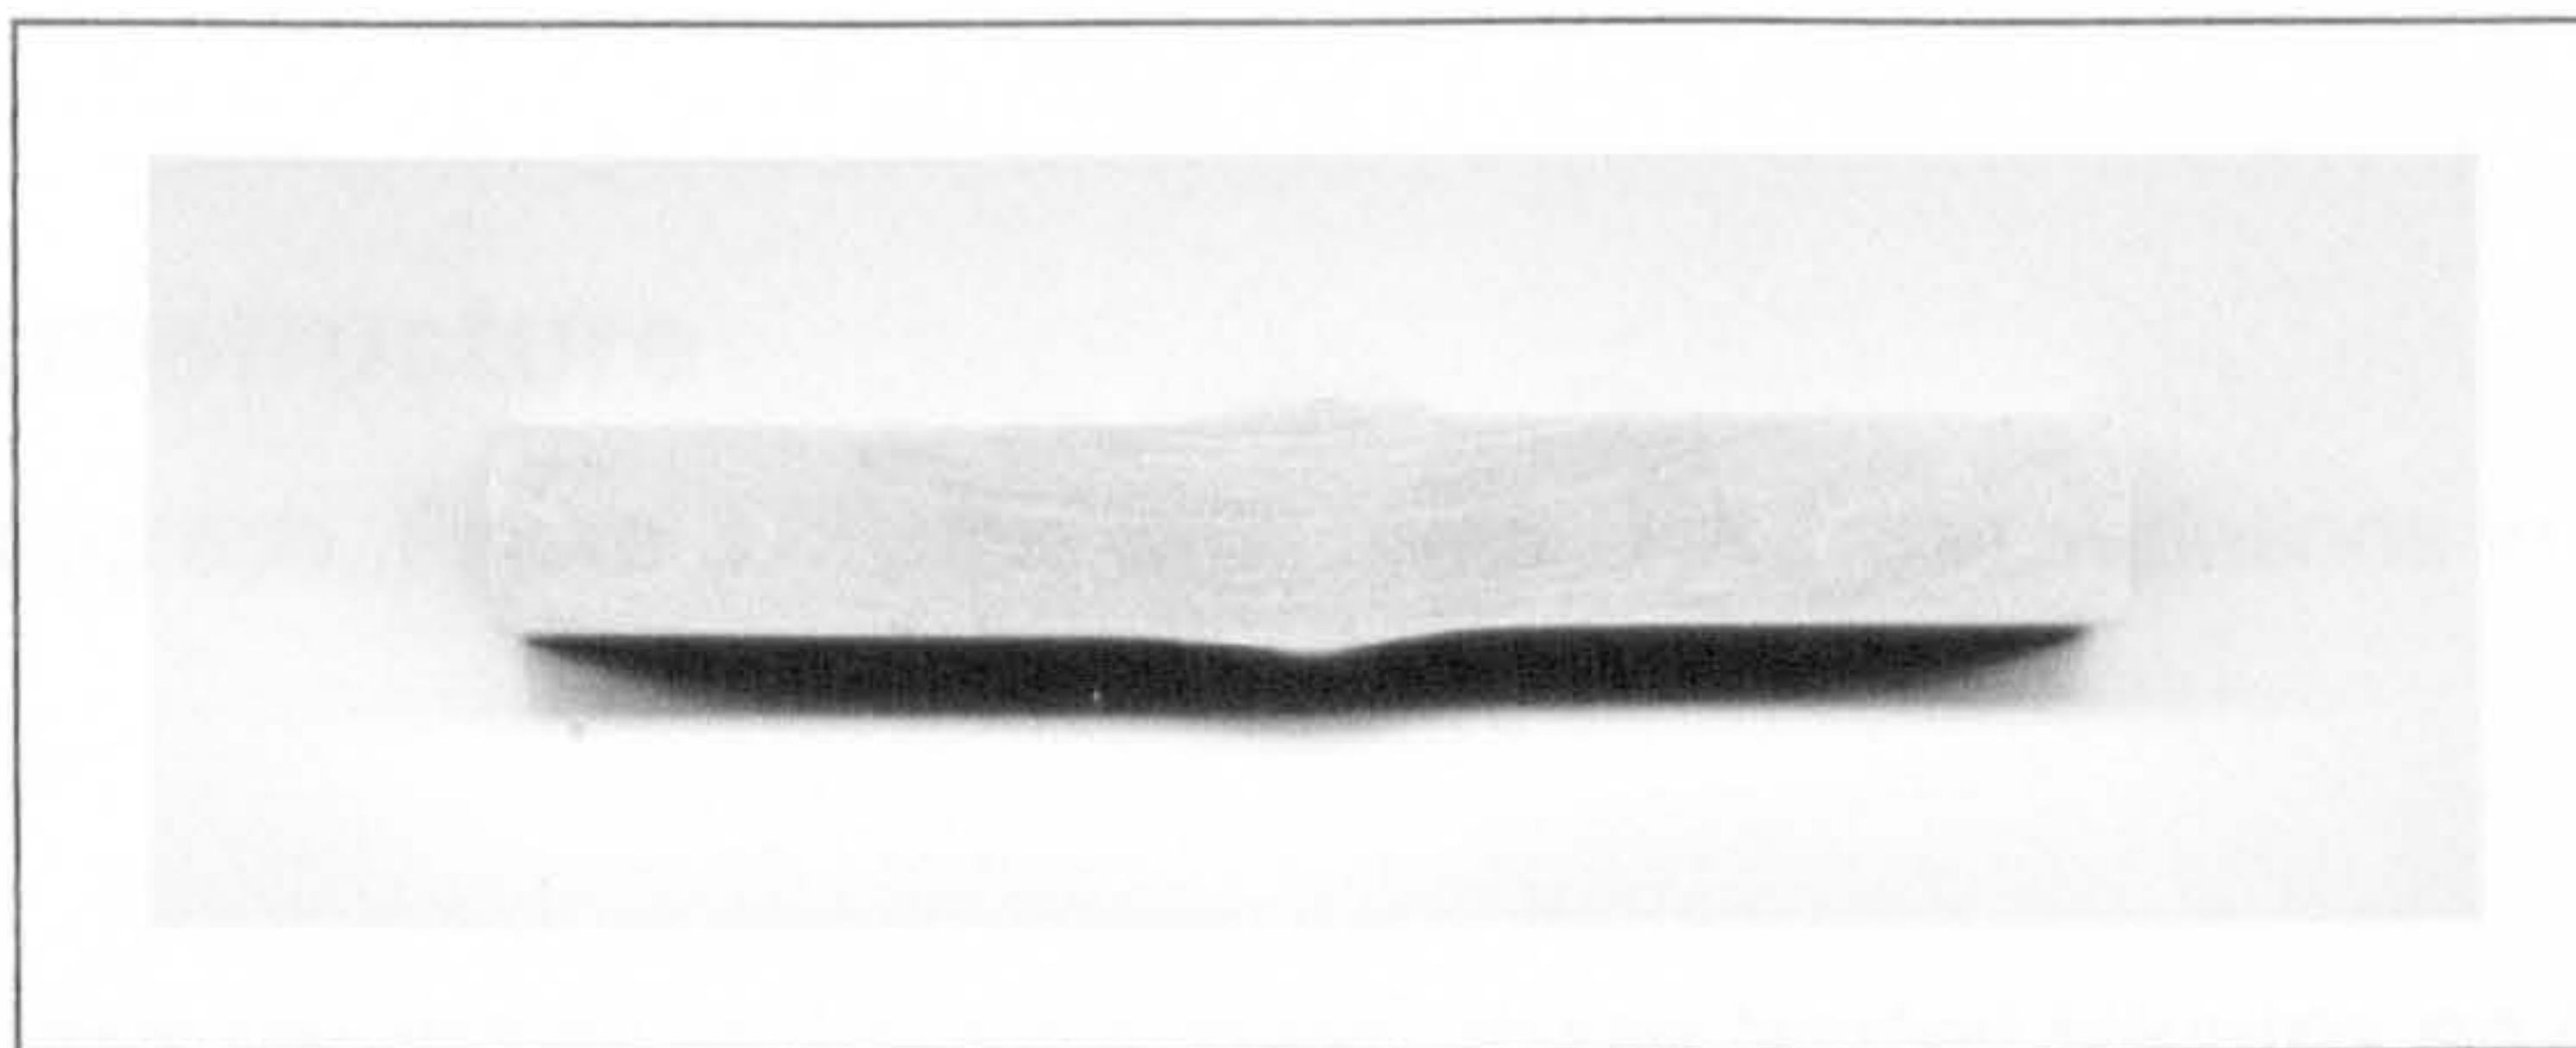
MIG LI weld bead geometry, 1st weld pass at the bottom (plate thickness 8 mm).
